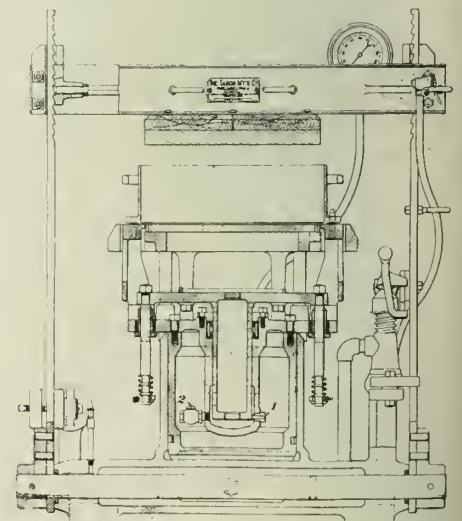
INTERNAL MECHANISM OF AIR-SQUEEZING. PATTERN-DRAWING, MOLDING MACHINE.
